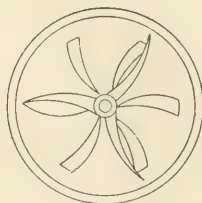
Gysser's Hand Peat Machine—Plan of Cylinder.
